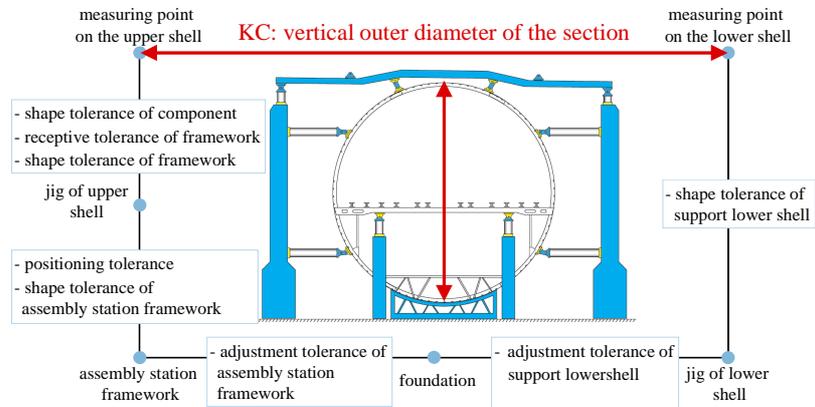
Tolerance chain for an aircraft fuselage section assembly
